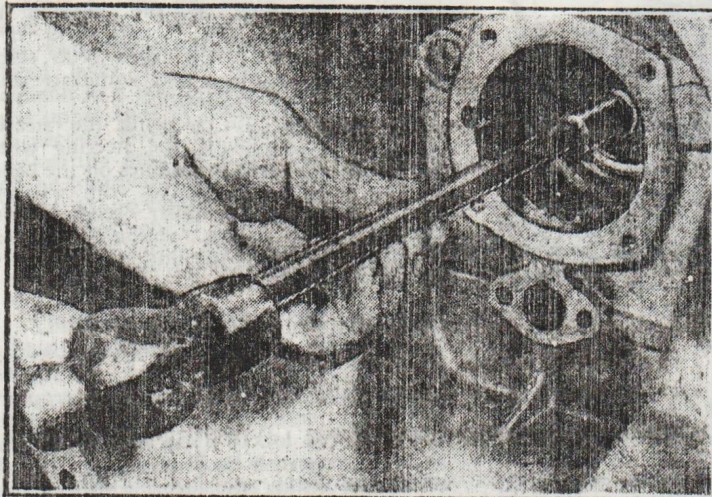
Tapping mainshaft assembly and bearing out of gearbox casing.
